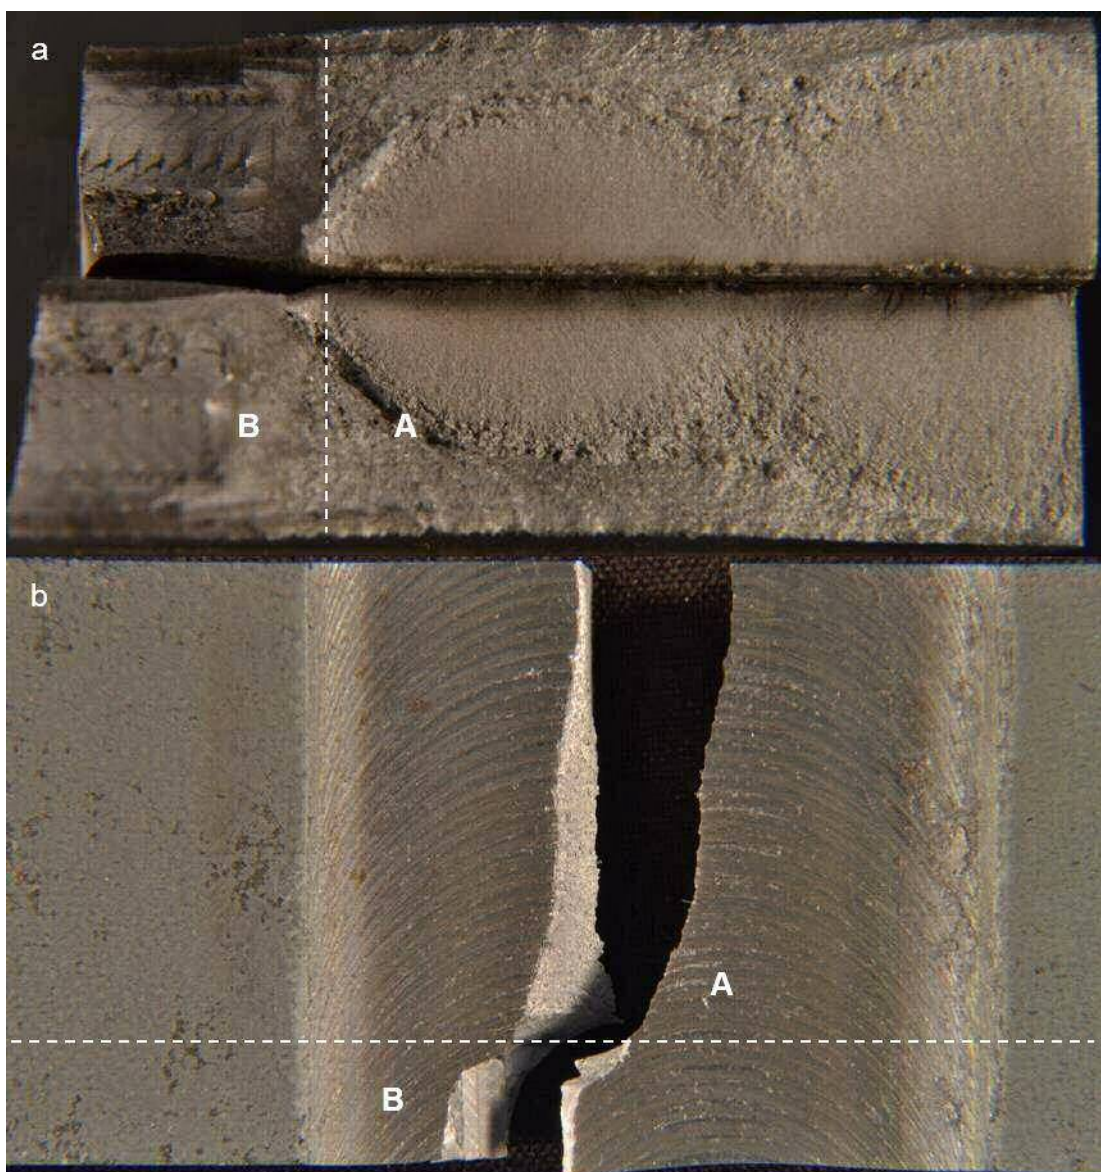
Fast weld sample tested at 80% of YS (416,112 cycles to fracture)
